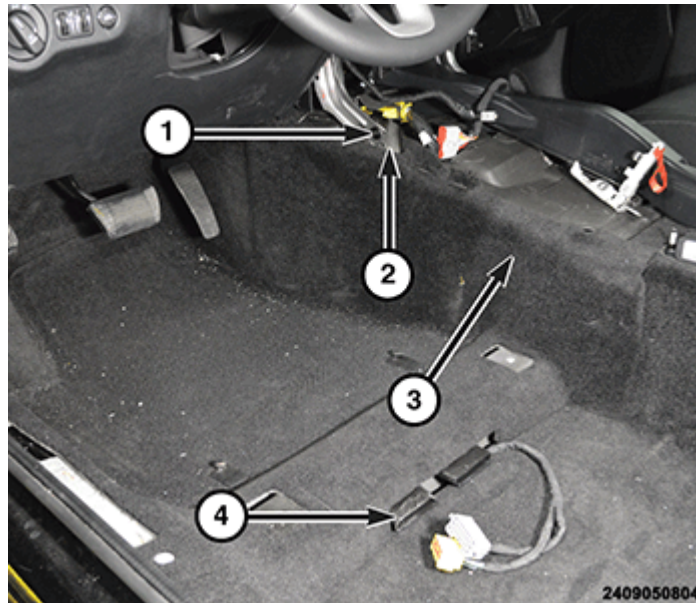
Bolt, Instrument Panel Bracket & Front Floor Carpet
